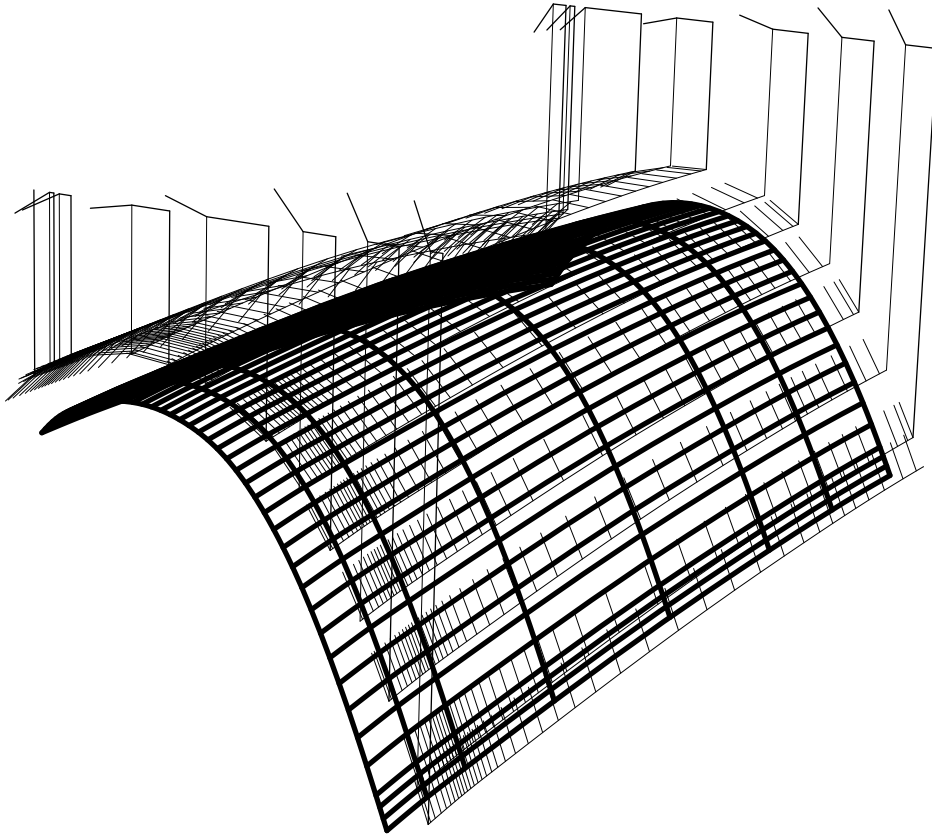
A simple example of the piecewise ruled surface side milling approach. The computed 5-axis side milling toolpath is shown with small vectors along the toolpath indicating the orientation of the tool. In this toolpath, the tool is retracted after each ruled surface path.
